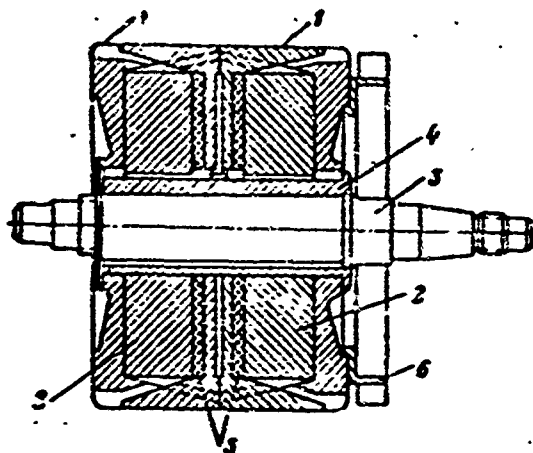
Double Larionov rotor. 1) Interlaced pole; 2) cylindrical magnets; 3) shaft; 4) nonmagnetic sleeve; 5) soft-steel ring; 6) fan.
